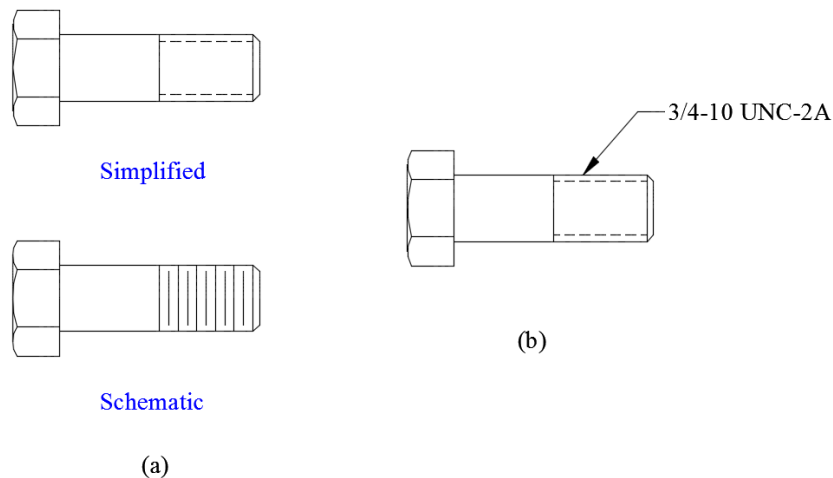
(a) Bolt representation (b) Example thread callout for drawings
